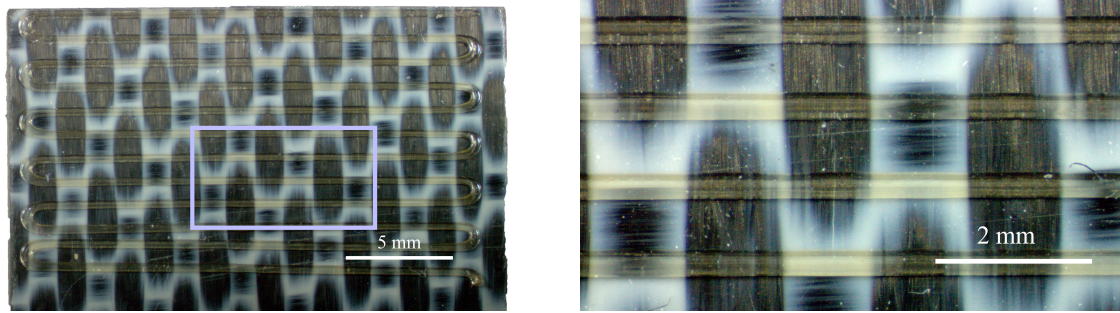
Two fracture surfaces of welds with the Extruded film as ED at the optimum displacement of 0.13 mm
